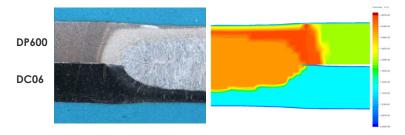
Hardness distribution with alloying in the weld nugget for spot welding of DP600 and DC06.
